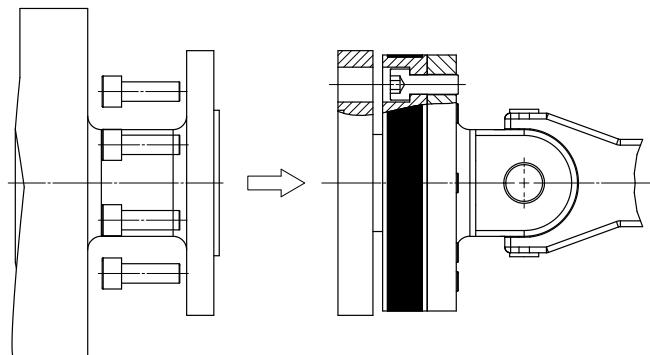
Mounting Flange to Measuring Flange/Coupling Assembly
